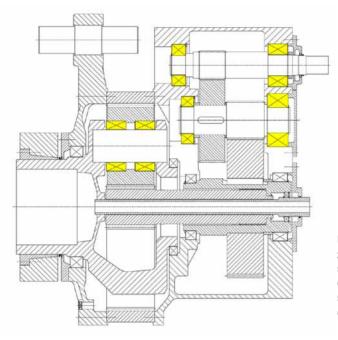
Standard Multi Megawatt (MMW) wind gearbox (for 3-point suspension) having a lowspeed planet stage and two spur wheel sections (high-speed intermediate shaft and high-speed shaft) with highlighted bearing locations that can be affected by premature bearing failures.
